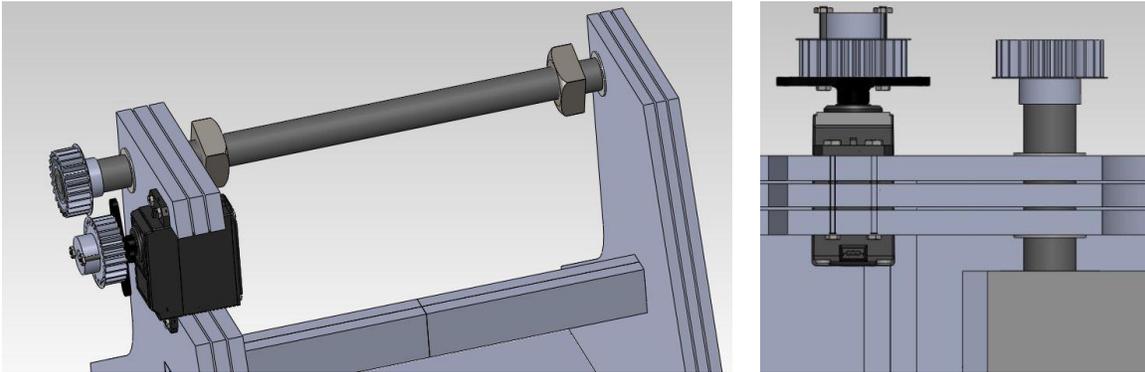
These images show how to assemble the shaft and servo (left), and align the pulleys (right).
